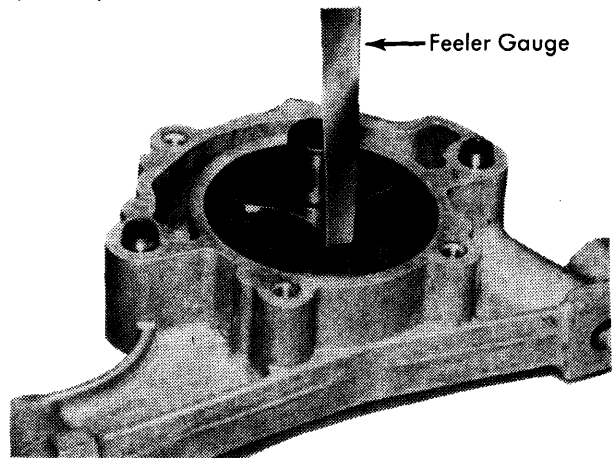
Using Feeler Gauge to Check Rotor Clearance
